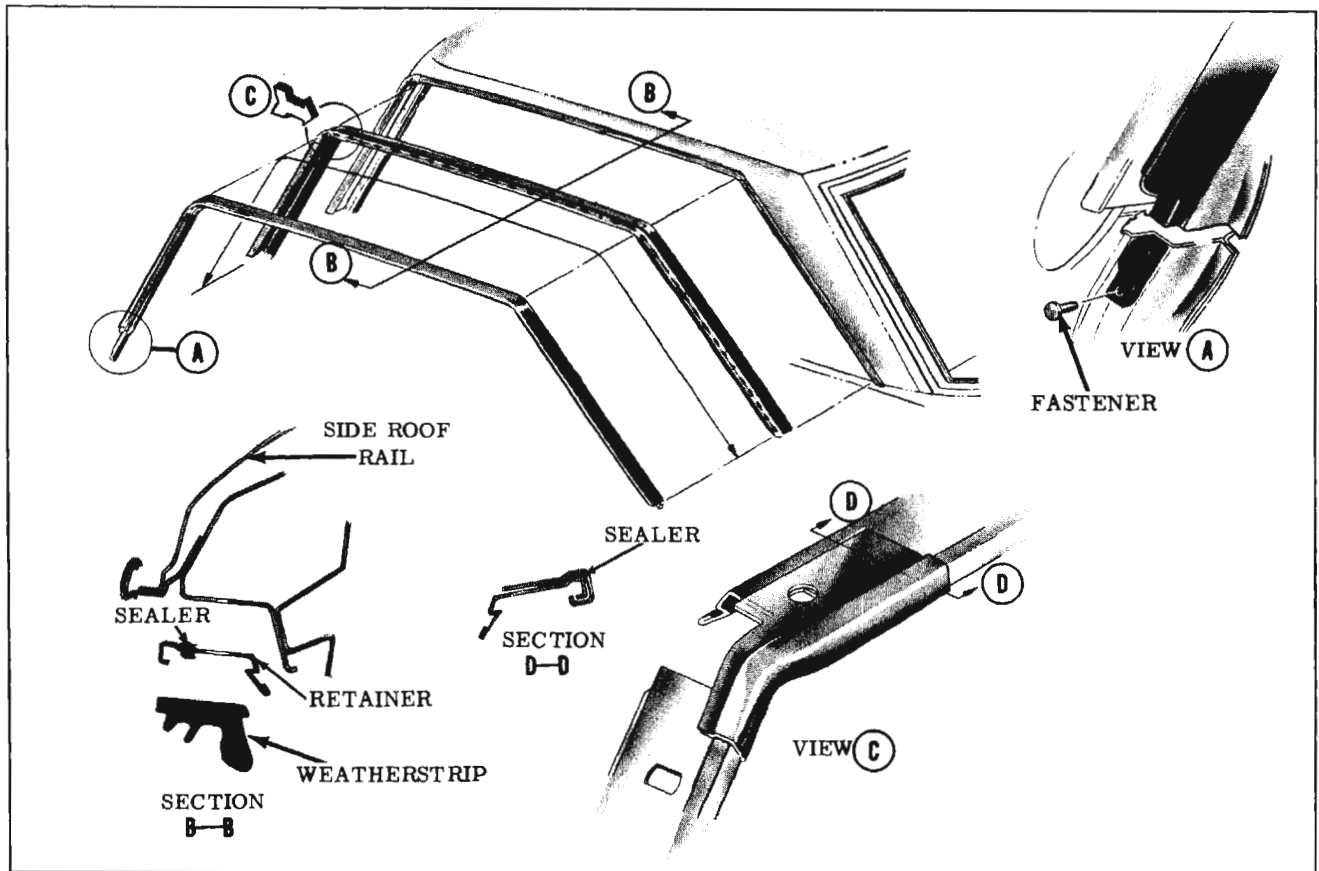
Side Roof Rail Weatherstrip (47 Styles)
